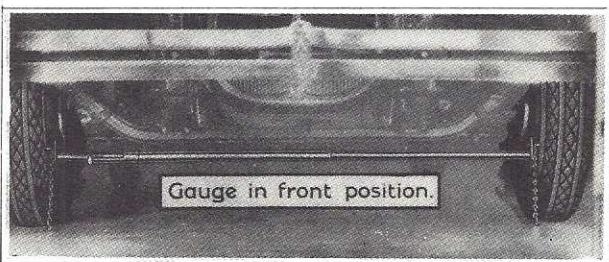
Checking "Toe-In" of Front Wheels with HM-117-B Wheel Aligner
